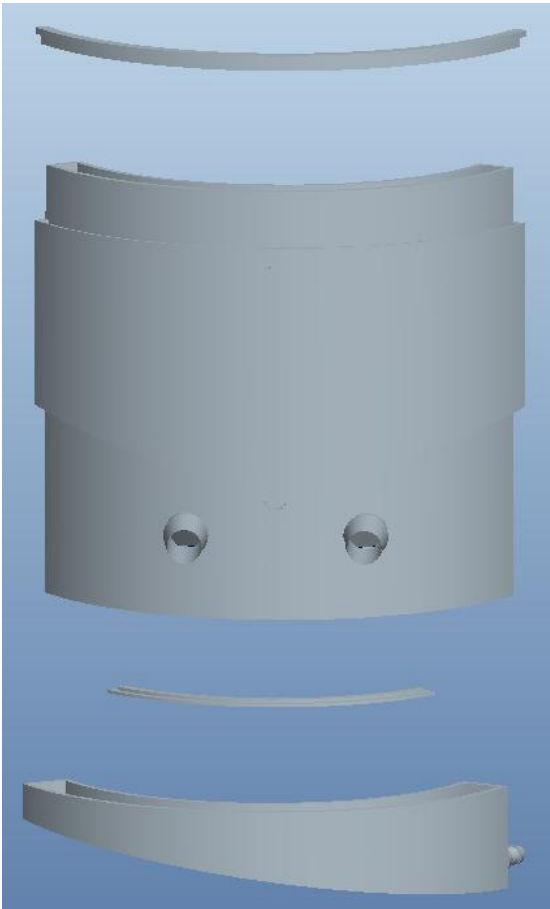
ProEngineer model showing an exploded view of the operational oxygenator module.
